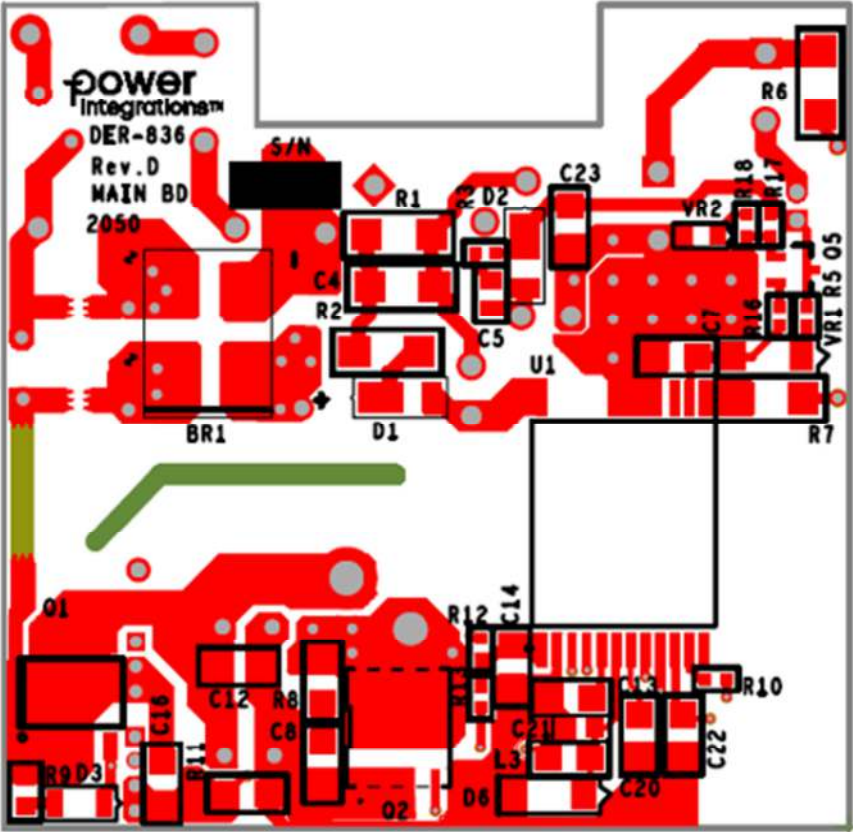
DER-836 Rev D PCB Layout, Bottom.
